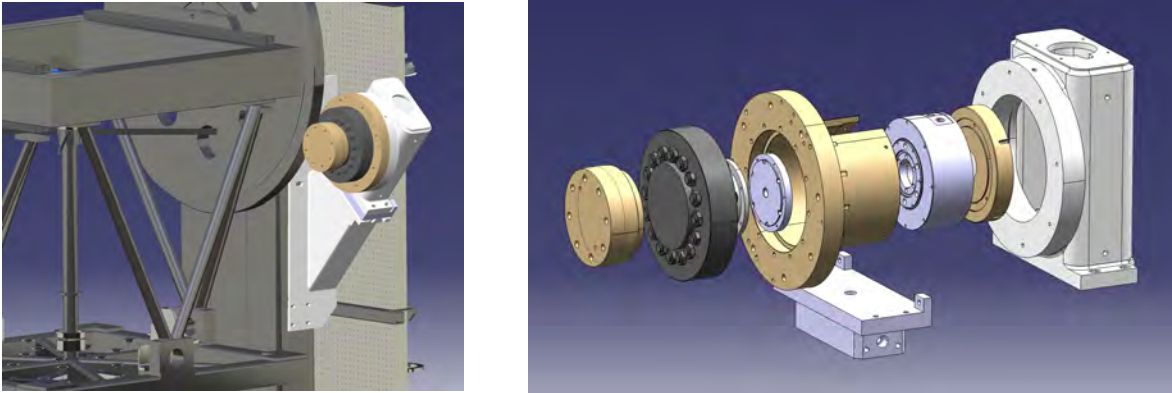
Left: Graphic representation of the elevation drive on the telescope. Right: Expanded view of the drive components.
